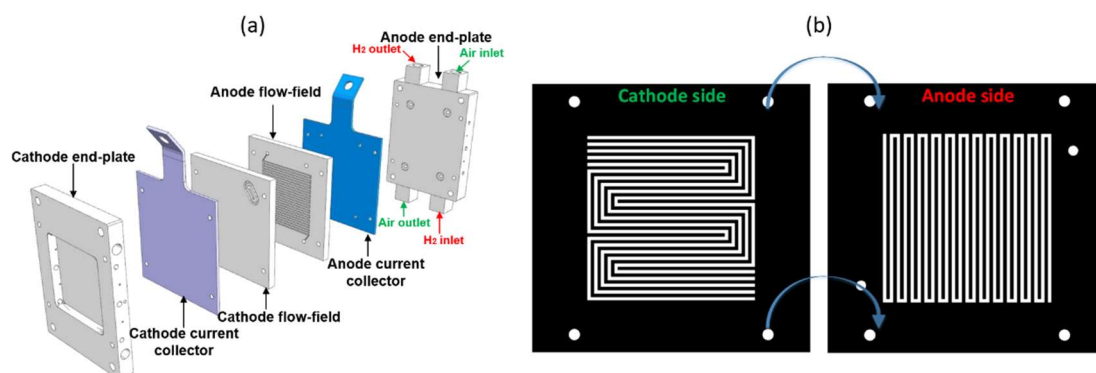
(a) Exploded view of individual PEFC components (excluding the MEA, which is between the flow-field plates; (b) flow-field design. For assembling, the cathode side is placed over the anode side.
